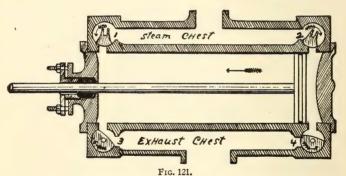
is a sectional view of the cylinder, steam, and exhaust-chests. and the valve-chambers of a Corliss engine. 1 and 2 are the steam-valves and 3 and 4 the exhaust-valves. The valves work in cylindrical chambers accurately bored out, the face of the valve being turned off to fit steam tight. They are what is termed rotative valves, that is, they receive a semi-rotary motion from the wrist-- late, which in turn is actuated by the eccentric.
